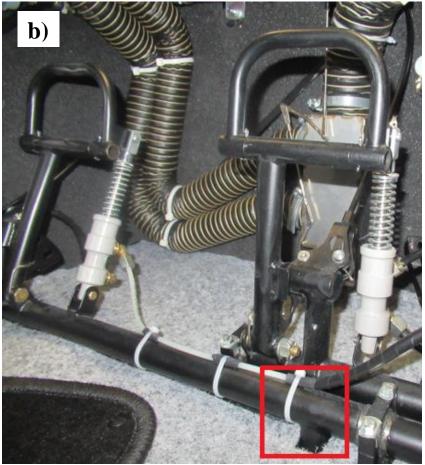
Locations of pedal assembly welded reinforcements
